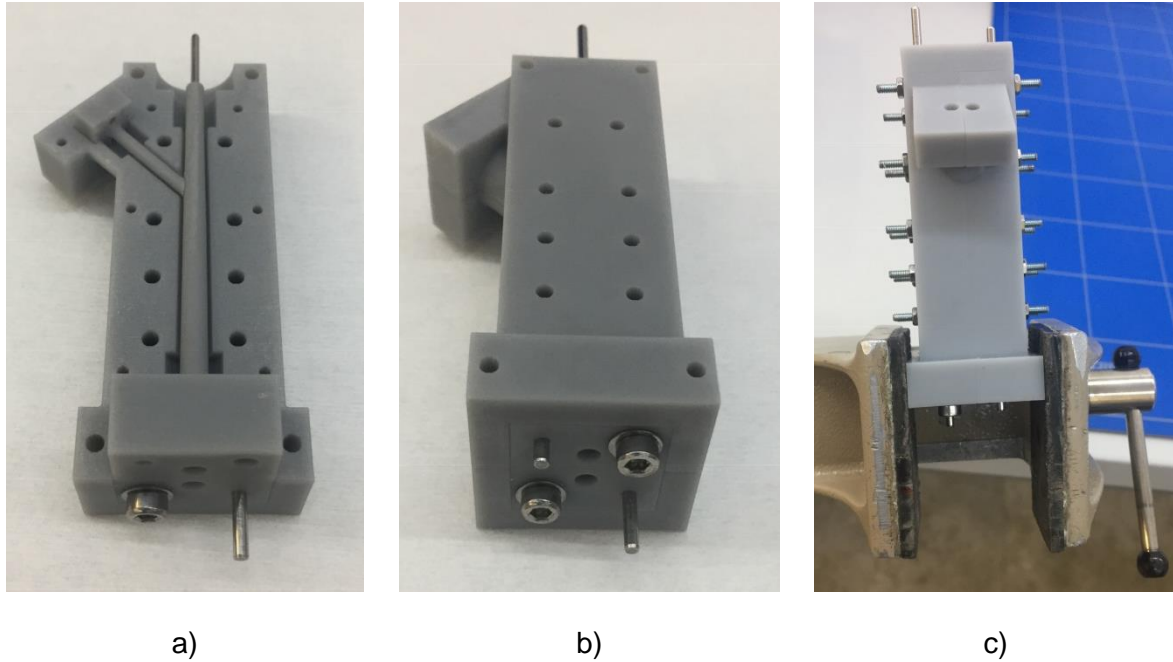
Assembly of rig. a) Mounting the inner mandrel to the first outer shell b) Attaching the second outer shell to the inner mandrel followed by mounting the cover c) Fastening the entire construction rig to a vice
